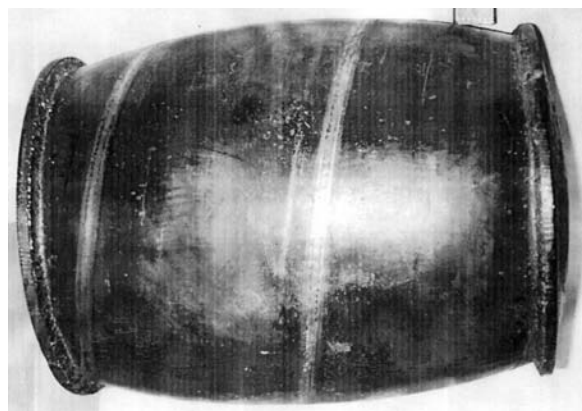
Appearance of mock-up of body of spirally-welded cylinder after tests using internal pressure
